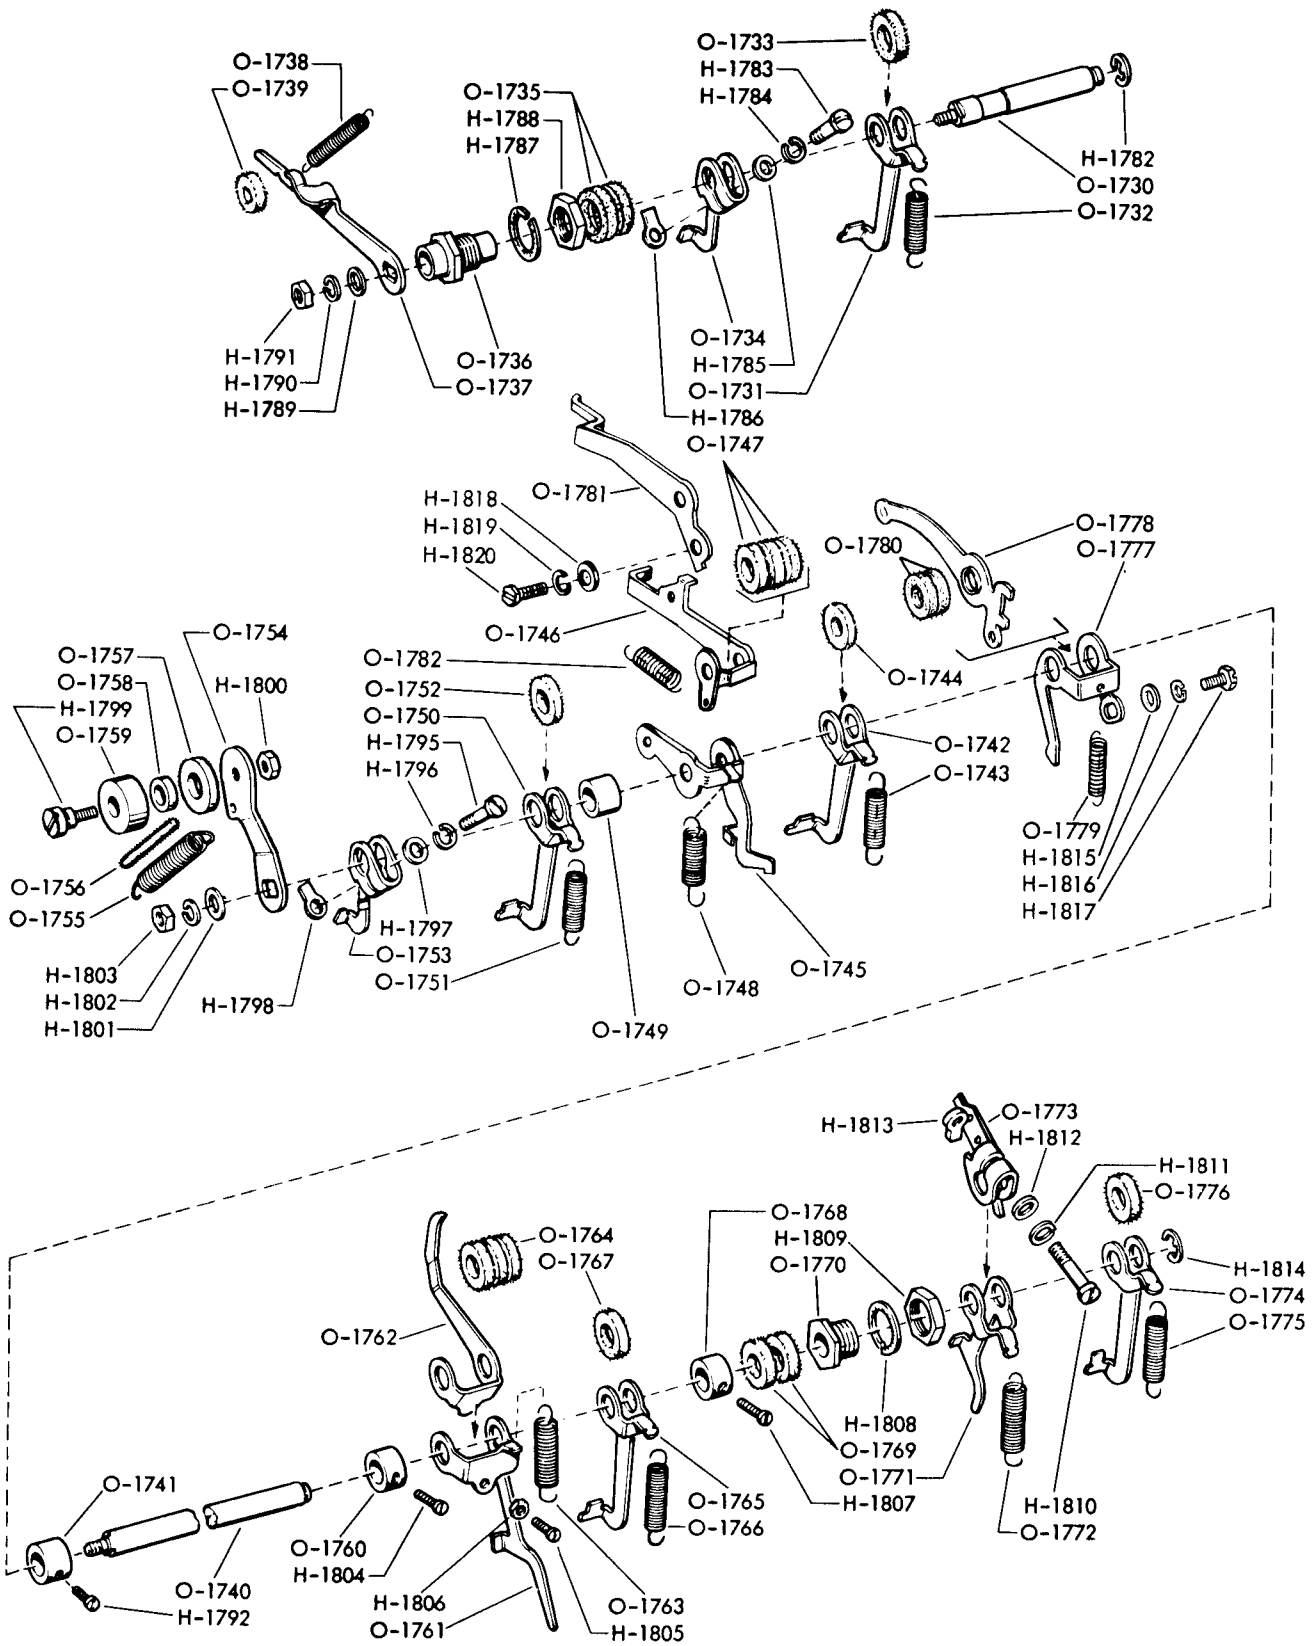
Automatic Typewriter, Trip Shaft Mechanism
